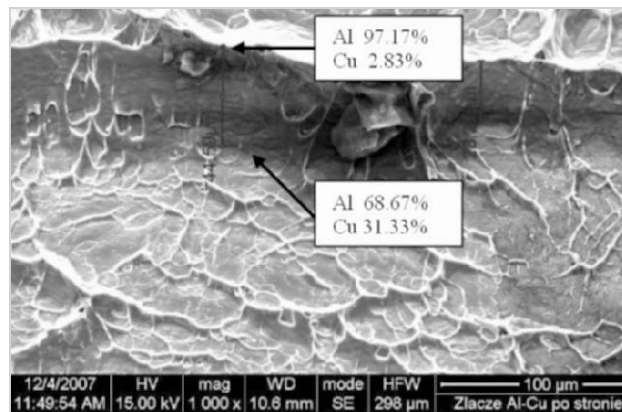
View of the fracture of a sample broken in a rolling test; chemical composition microanalysis has been performed on the Cu side of the fracture by means of a scanning microscope
